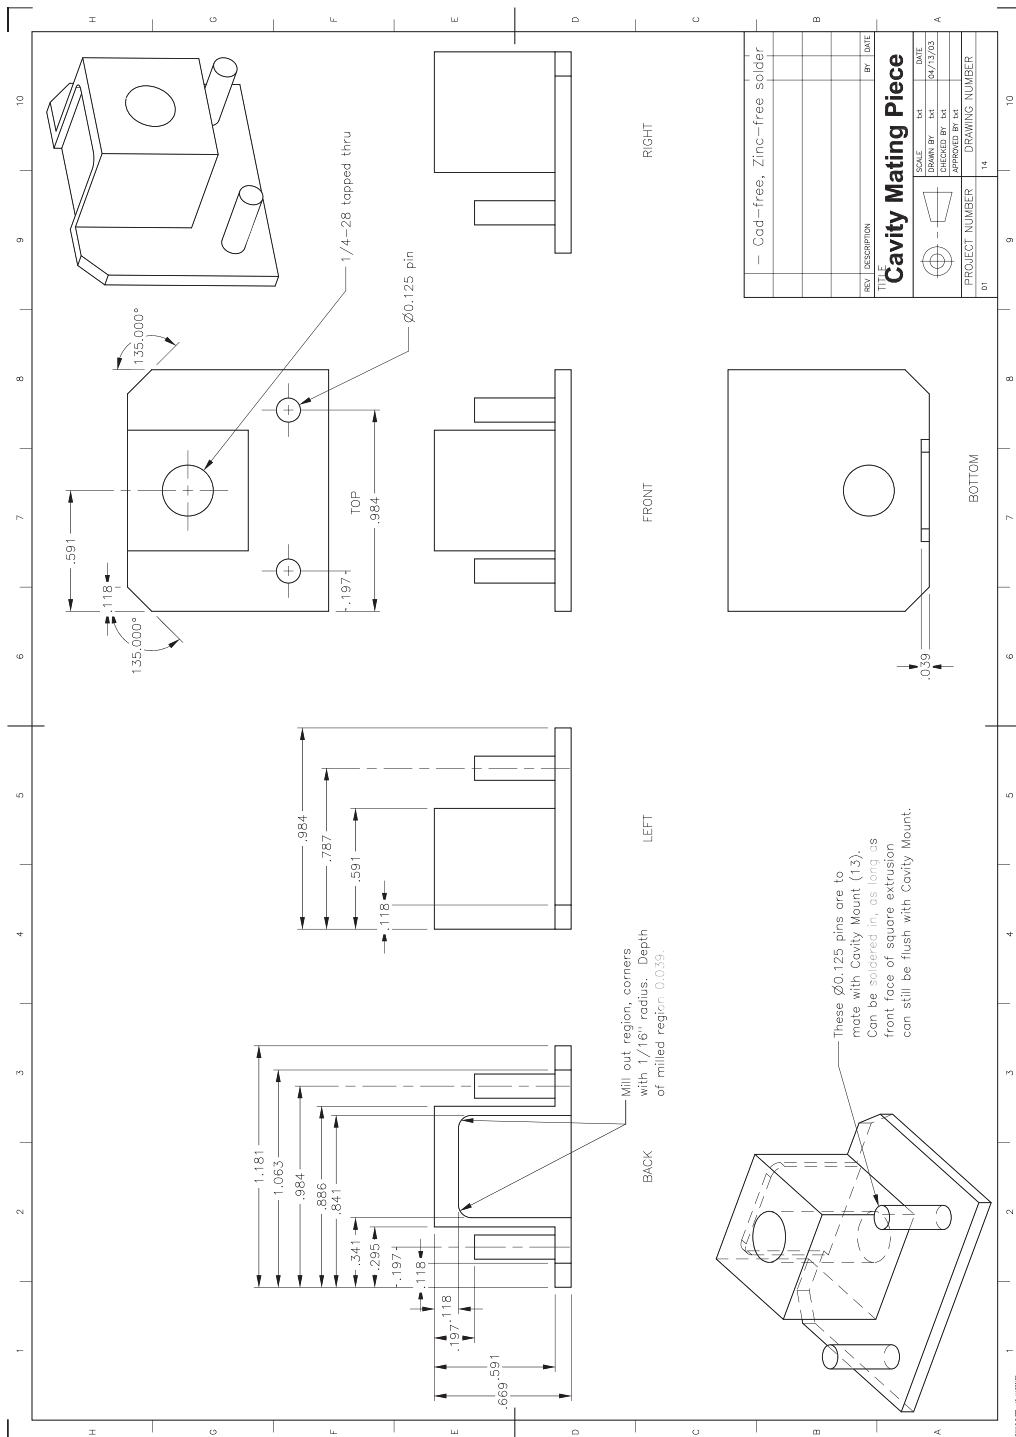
The cavity mount mating piece, second mirror goes on here.
